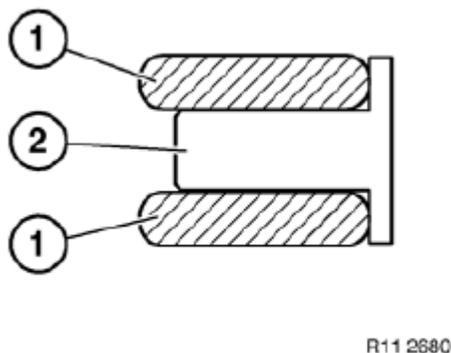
Inserting Support Spring Into Piston Ring Groove
